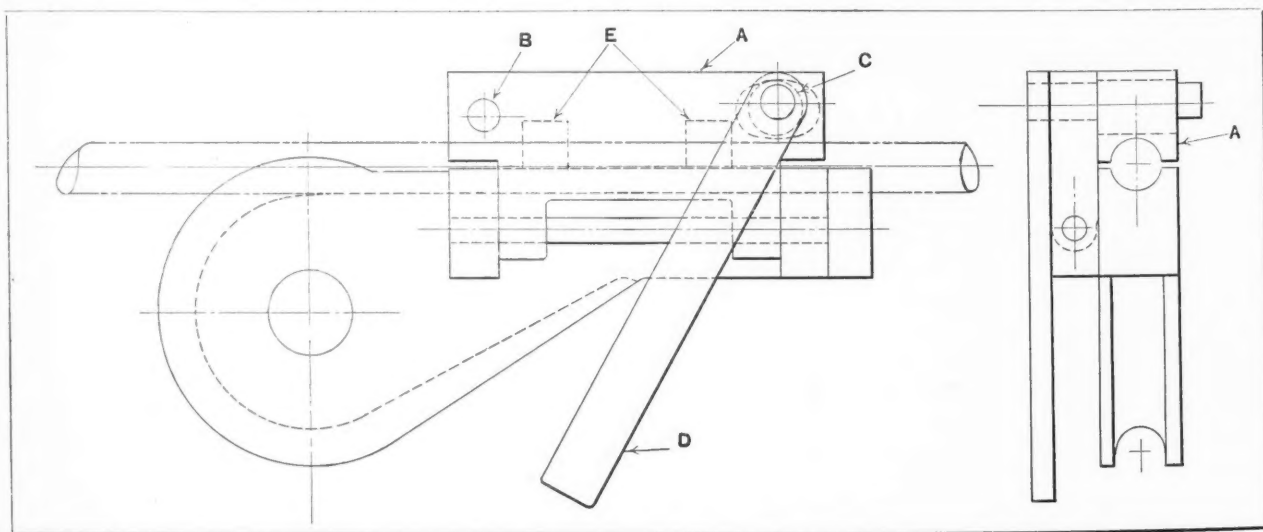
Assembly of Clamp for Holding Pipe in Place on Bending Form
